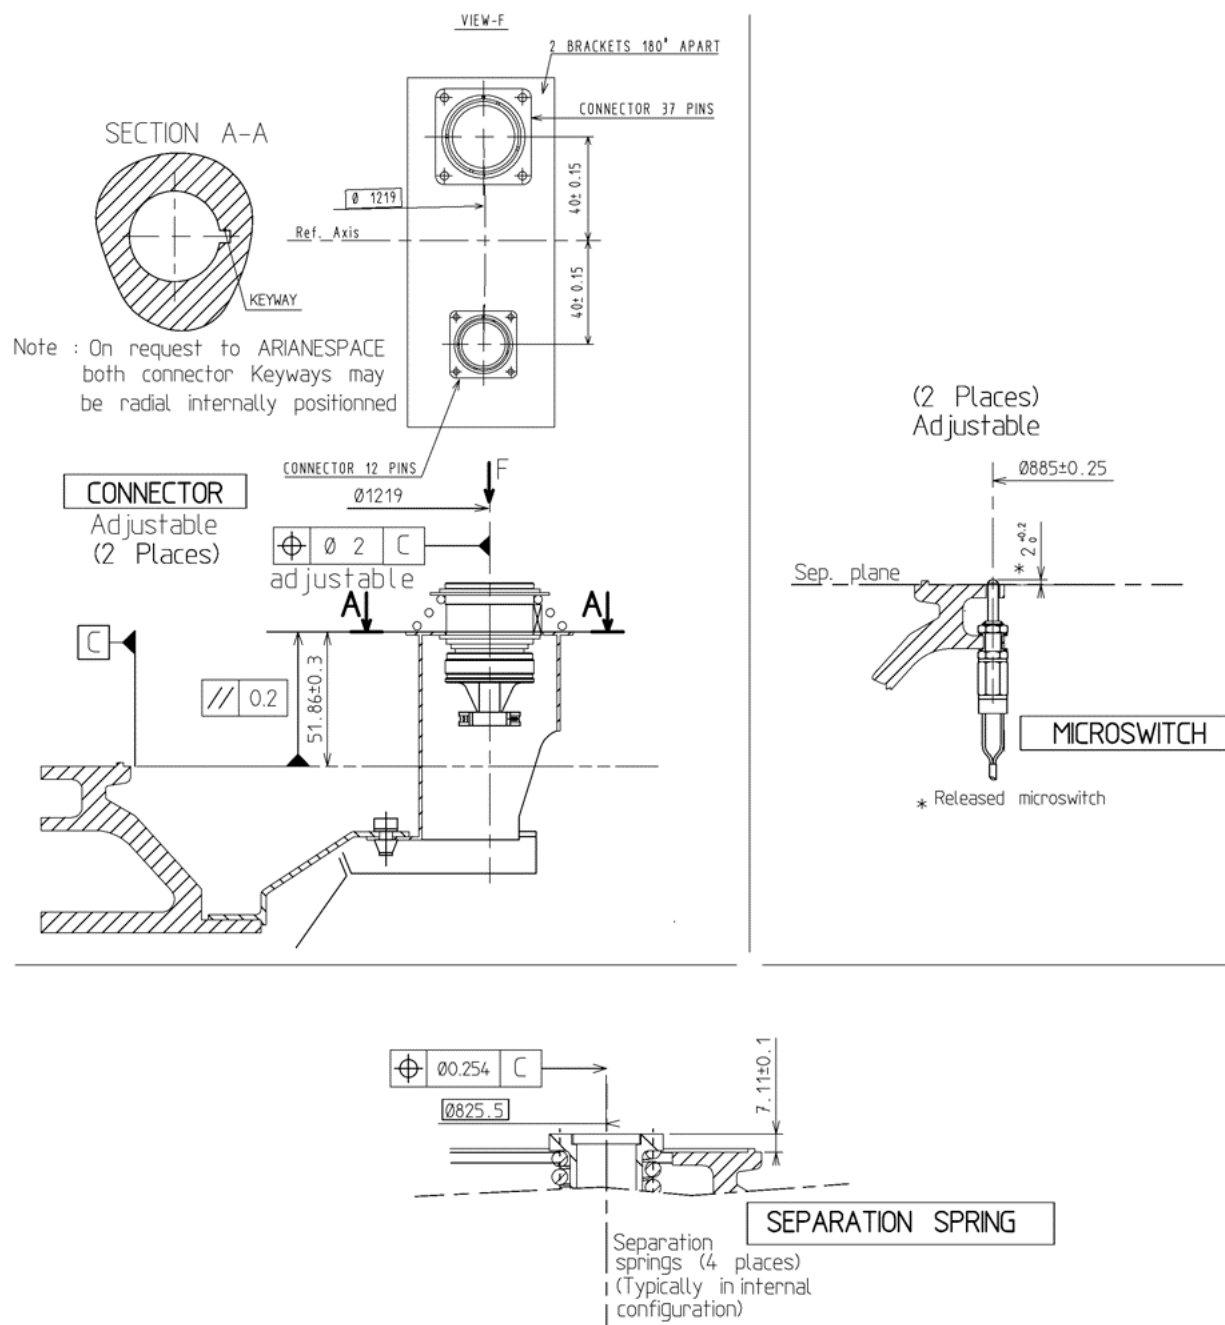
Adaptor 937VB5 mechanical interfaces (details)
